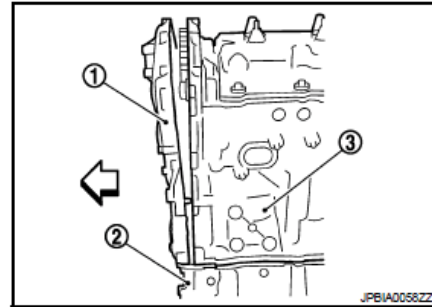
Identifying Front Timing Chain Case And Oil Pan (Upper) Cylinder Block
